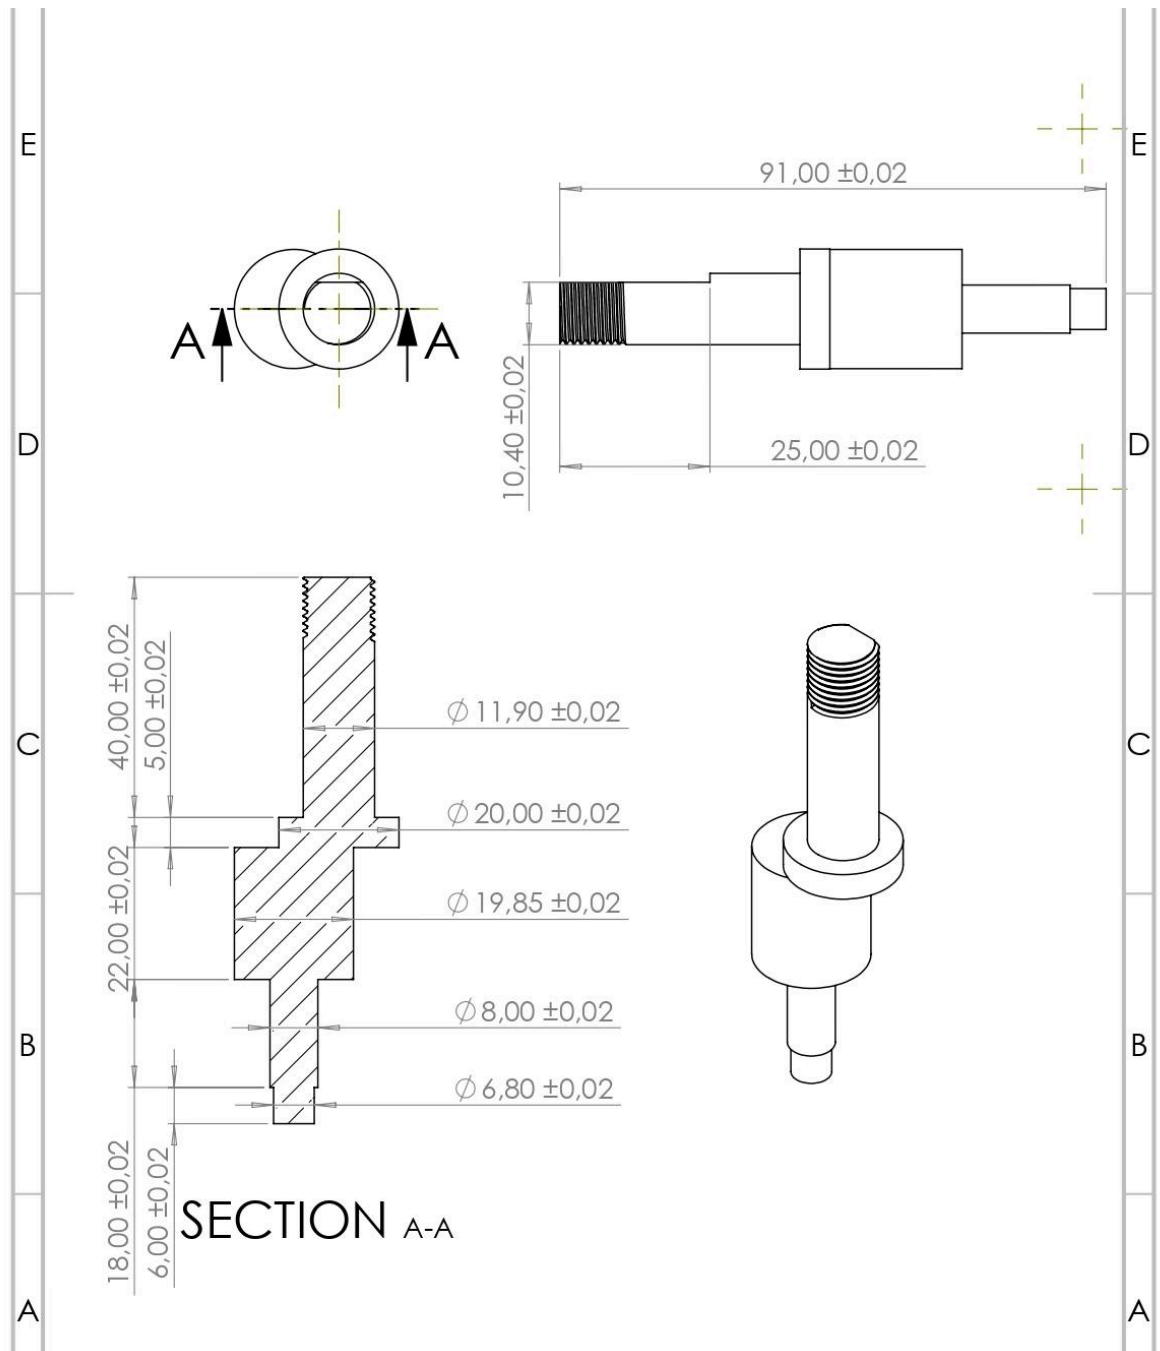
3D printed LiquidPiston Engine shaft drawing
